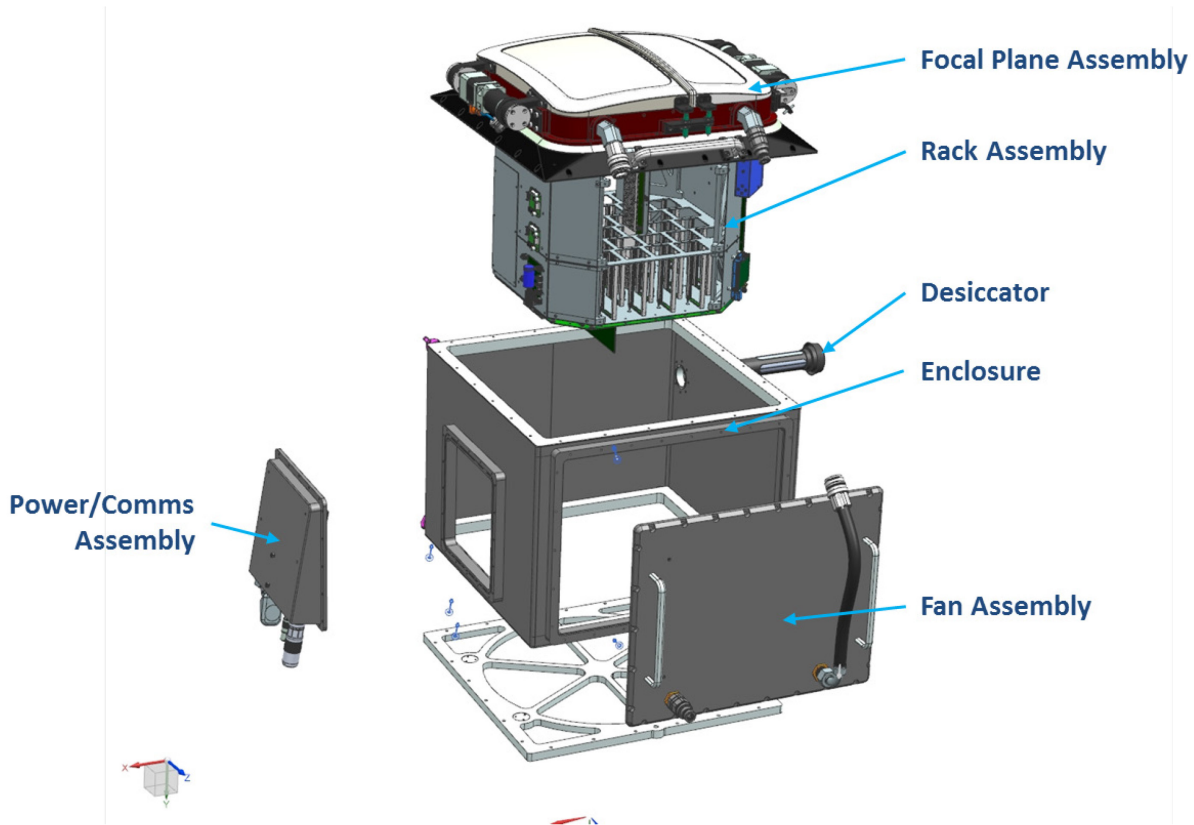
an exploded view of the CHEC-S camera showing the individual mechanical components. The rack assembly is shown without the FEE modules installed.
